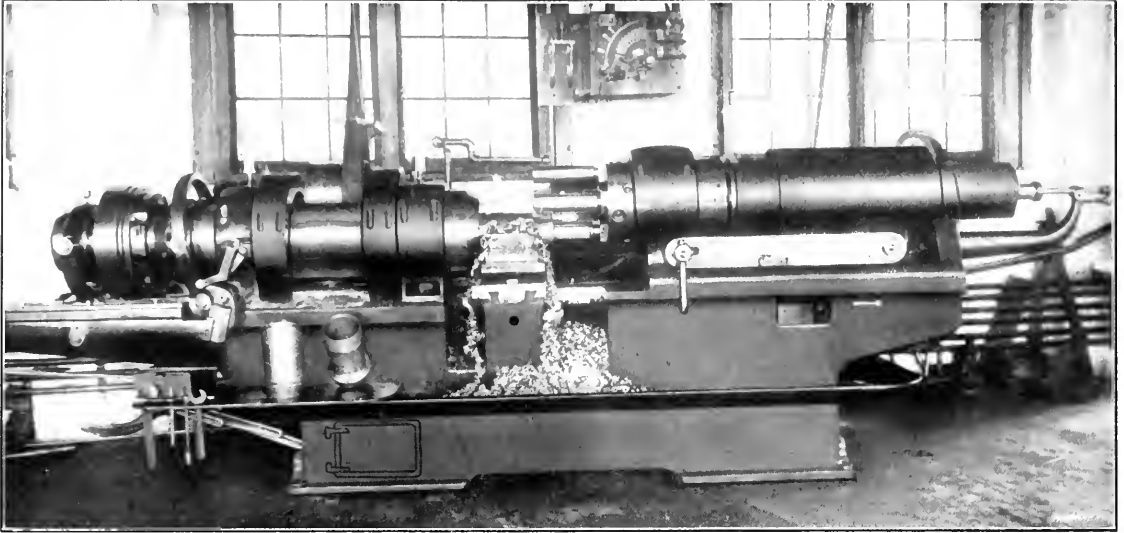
Front View of 7 3/4-inch Cleveland Automatic Screw Machine (Gear Guards removed)
